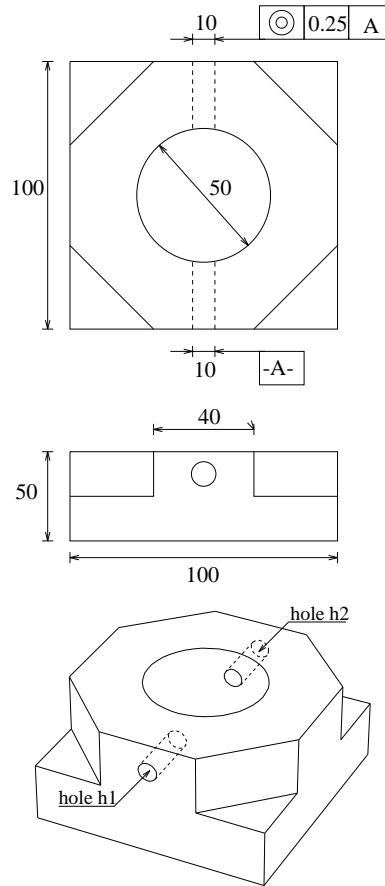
An Example of a design with dimensions and tolerances that cannot be achieved on a 3-axis vertical machining center (from [9]).
